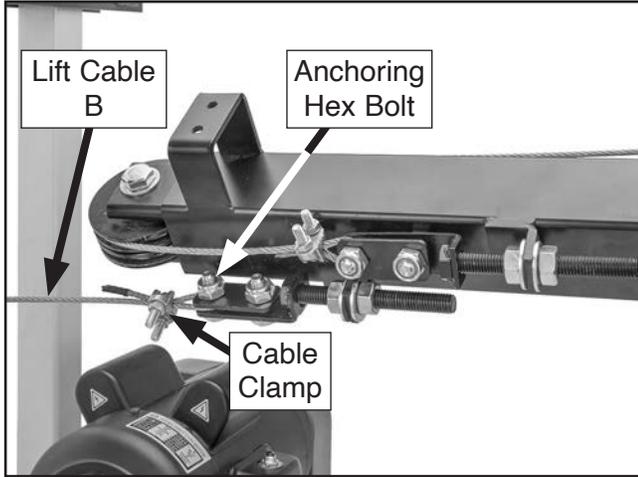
First end of lift cable B secured (switch panel removed for clarity).
